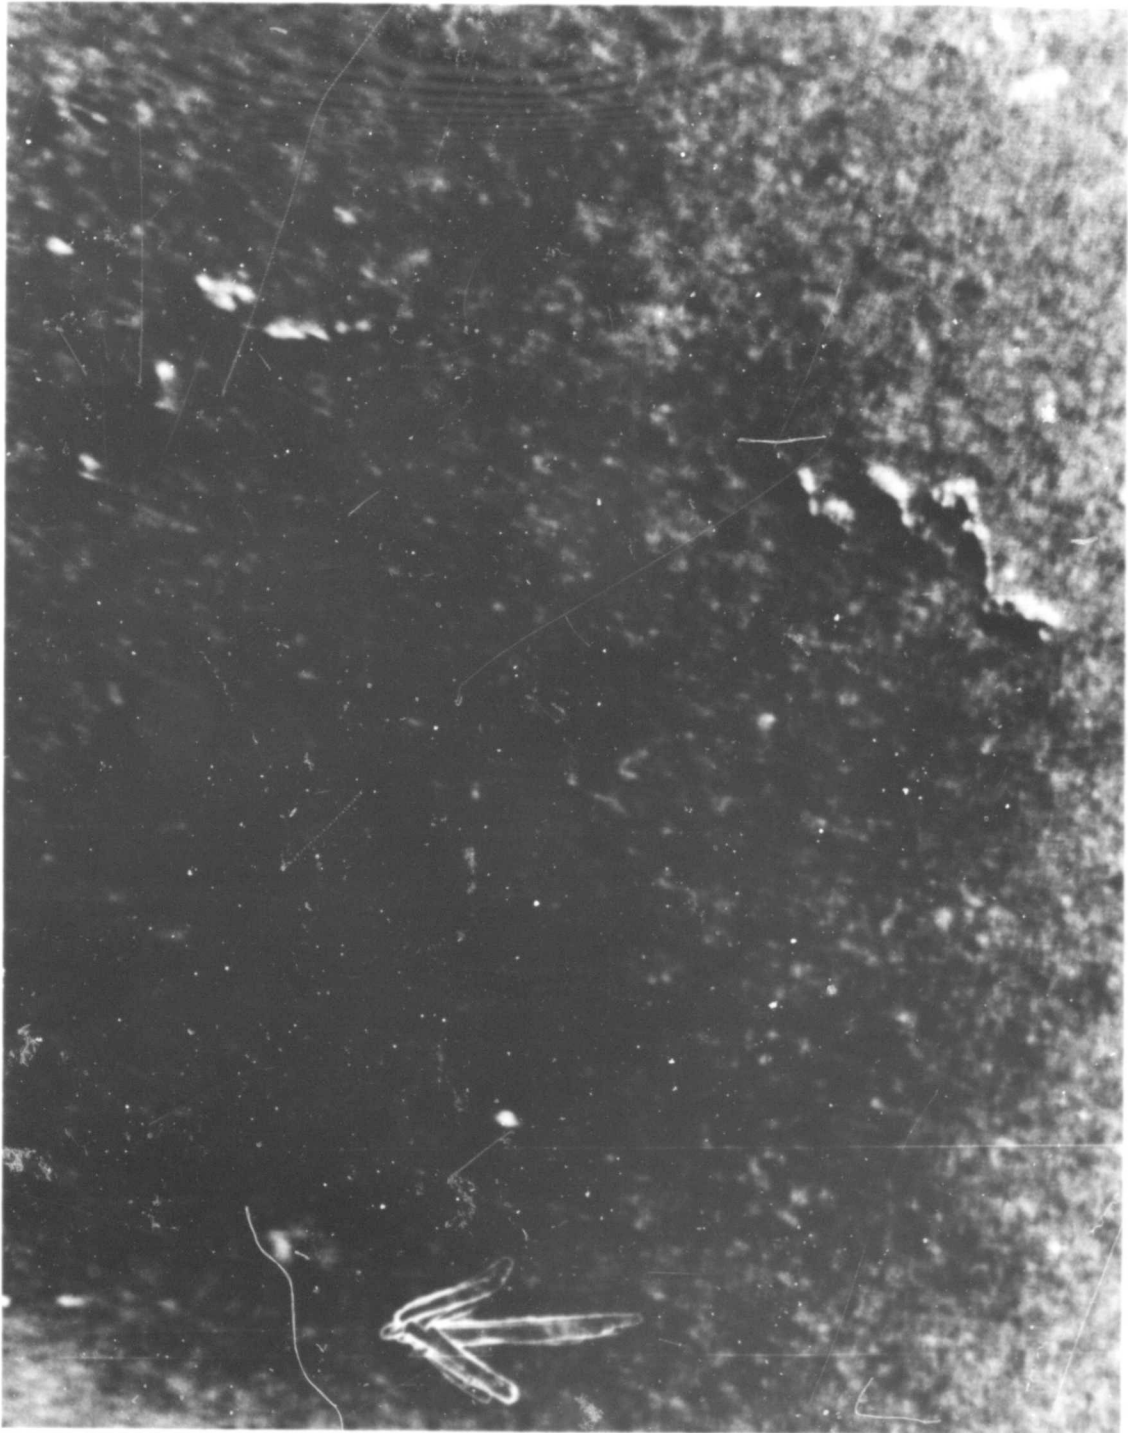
Enlargement of the Cross Sectional View of Figure IV-5 Showing the Fracture Markings in Detail
